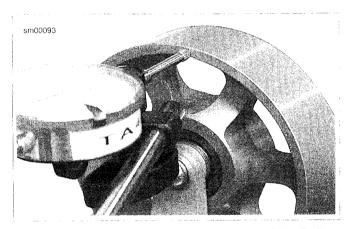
Measuring Lateral Side Play on Idler Pulley
